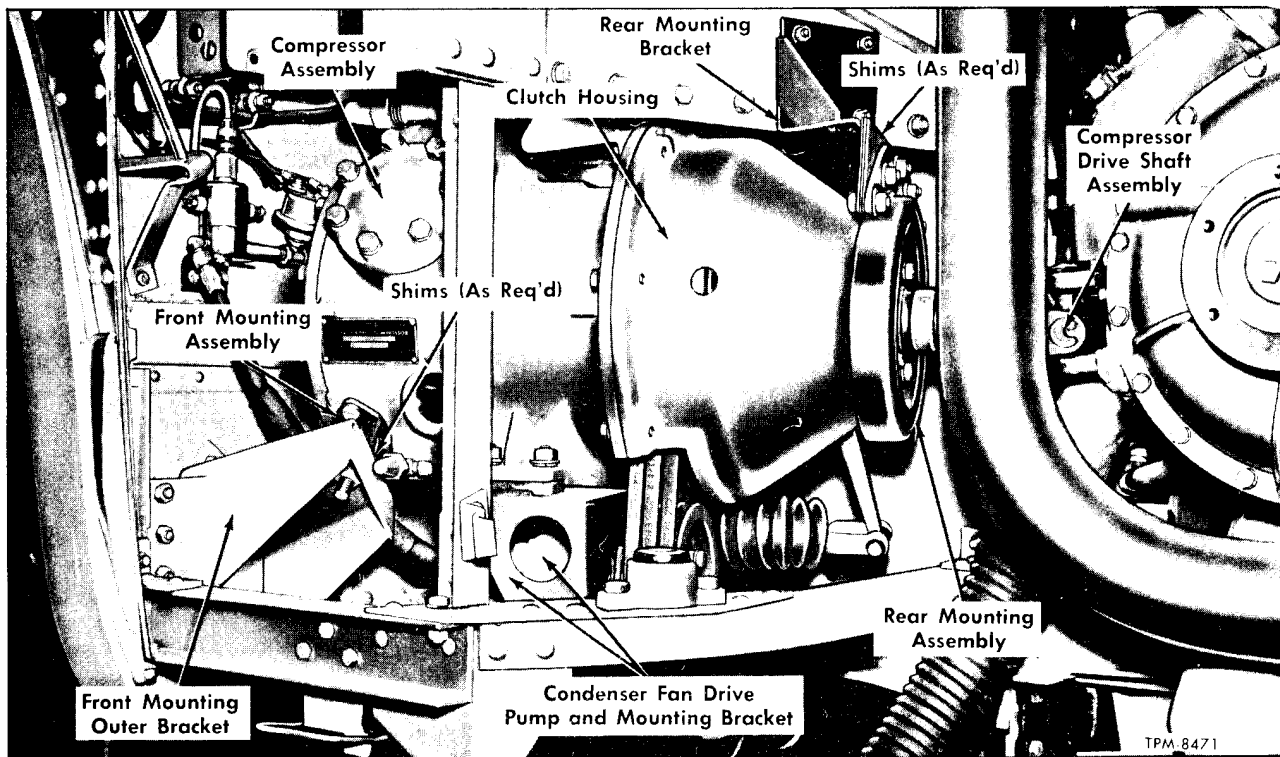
Compressor and Clutch Assembly Installed (Radiator Removed)
